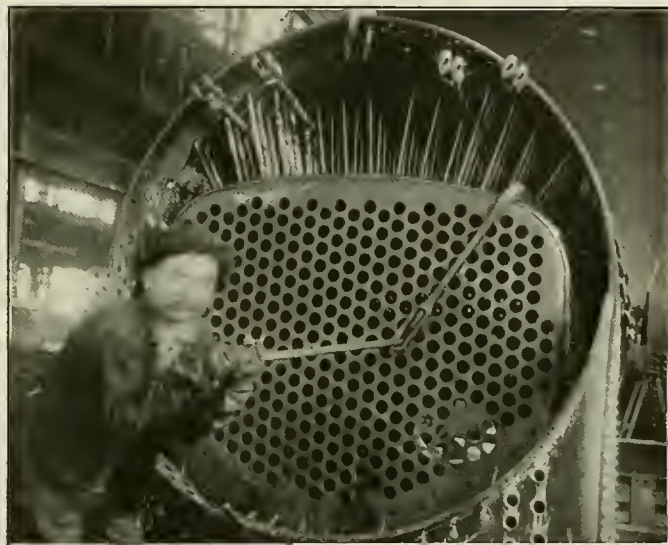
Holder-On for Riveting Tube Sheets to the Crown and Side Sheets
